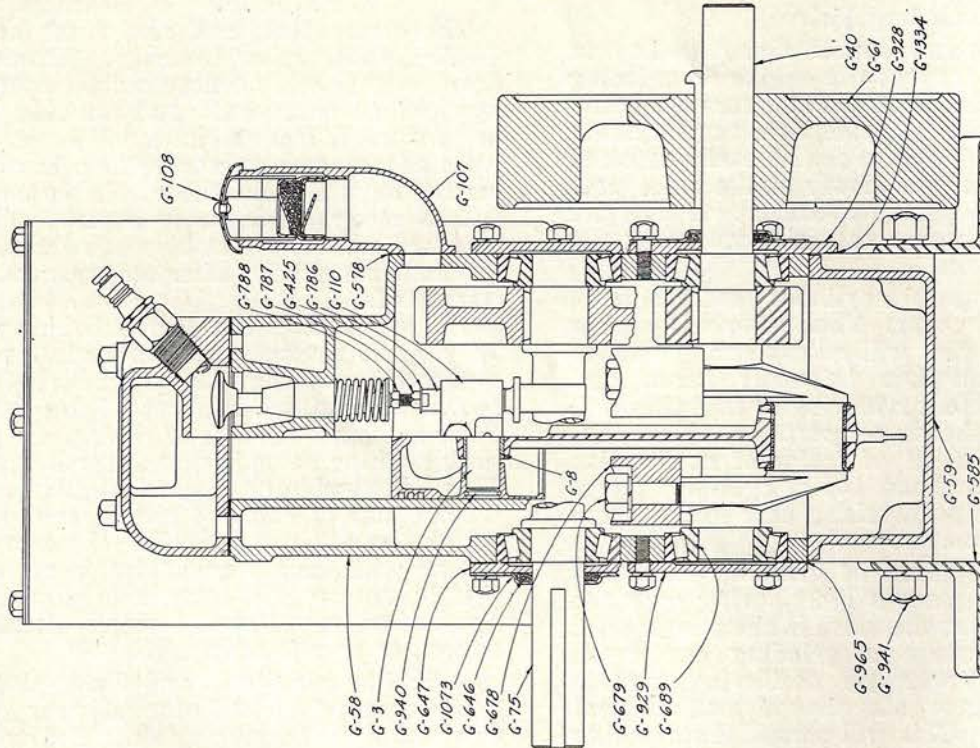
SECTIONAL VIEW MODEL AG ENGINE
